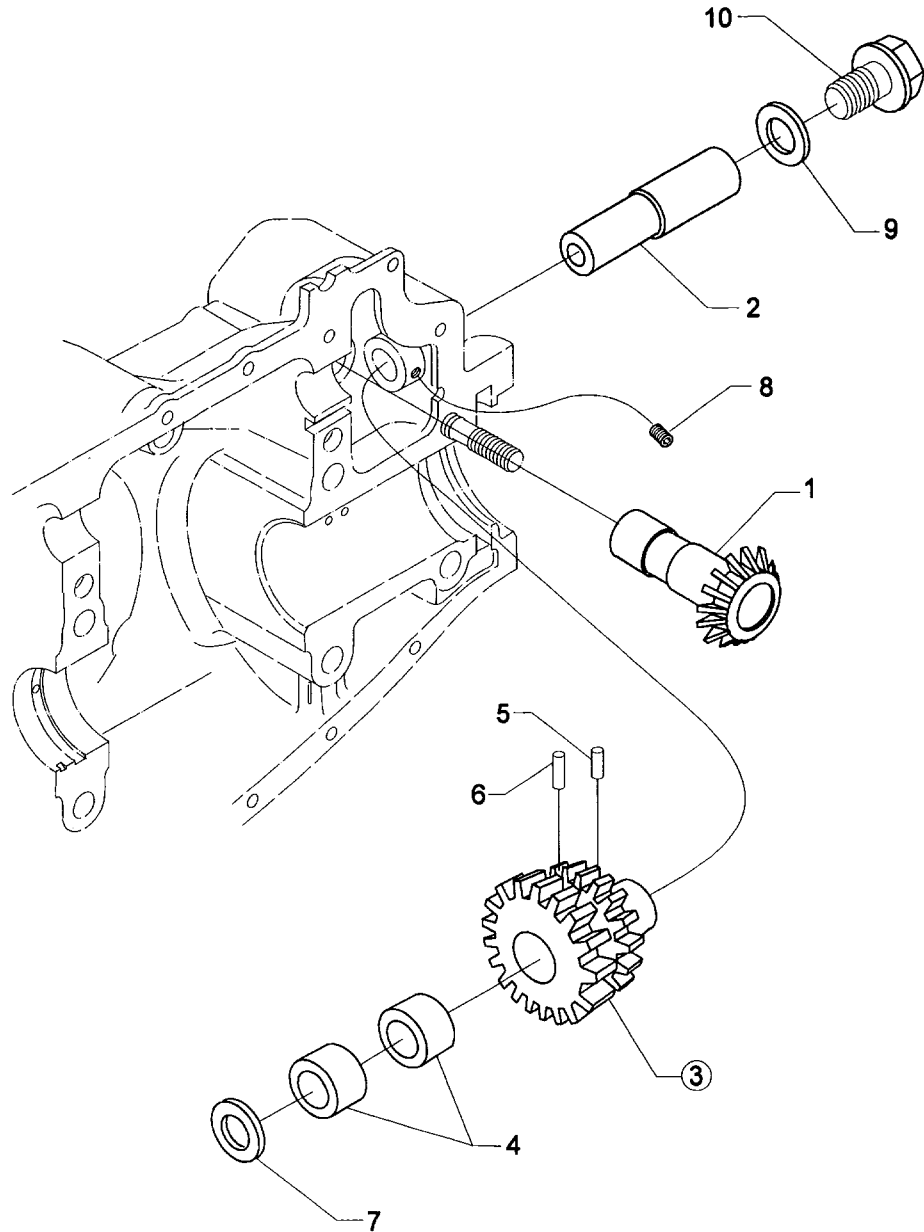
PROPELLER GOVERNOR DRIVE ASSEMBLY (CRANKCASE)
